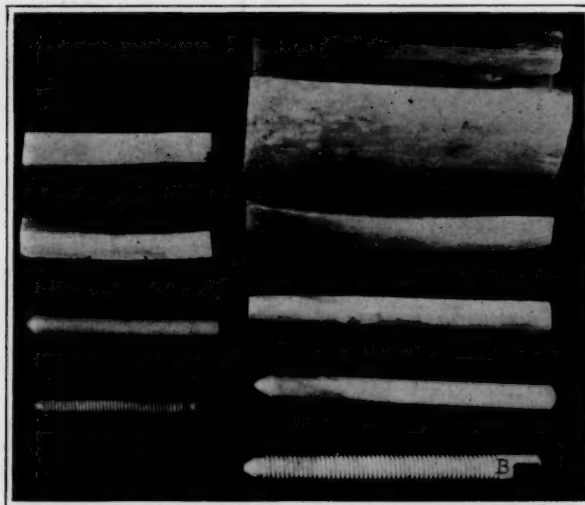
PIECE OF BEEF-BONE WITH STRIPS, BLANKS AND SCREWS: A, MEDIUM SIZED SCREW, 10 BY 24; B, LARGE SIZED SCREW, 5/16 BY 18
